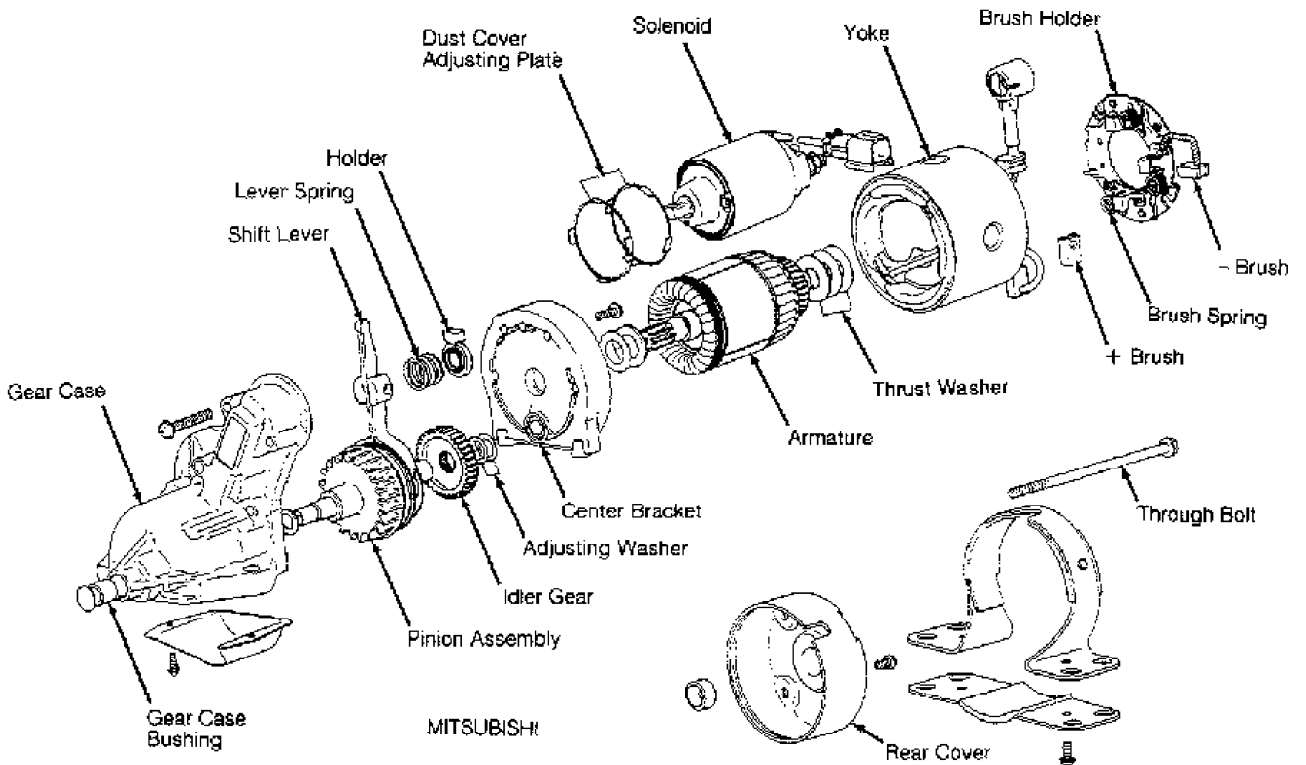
Exploded View Of Mitsubishi Starter (M30)
